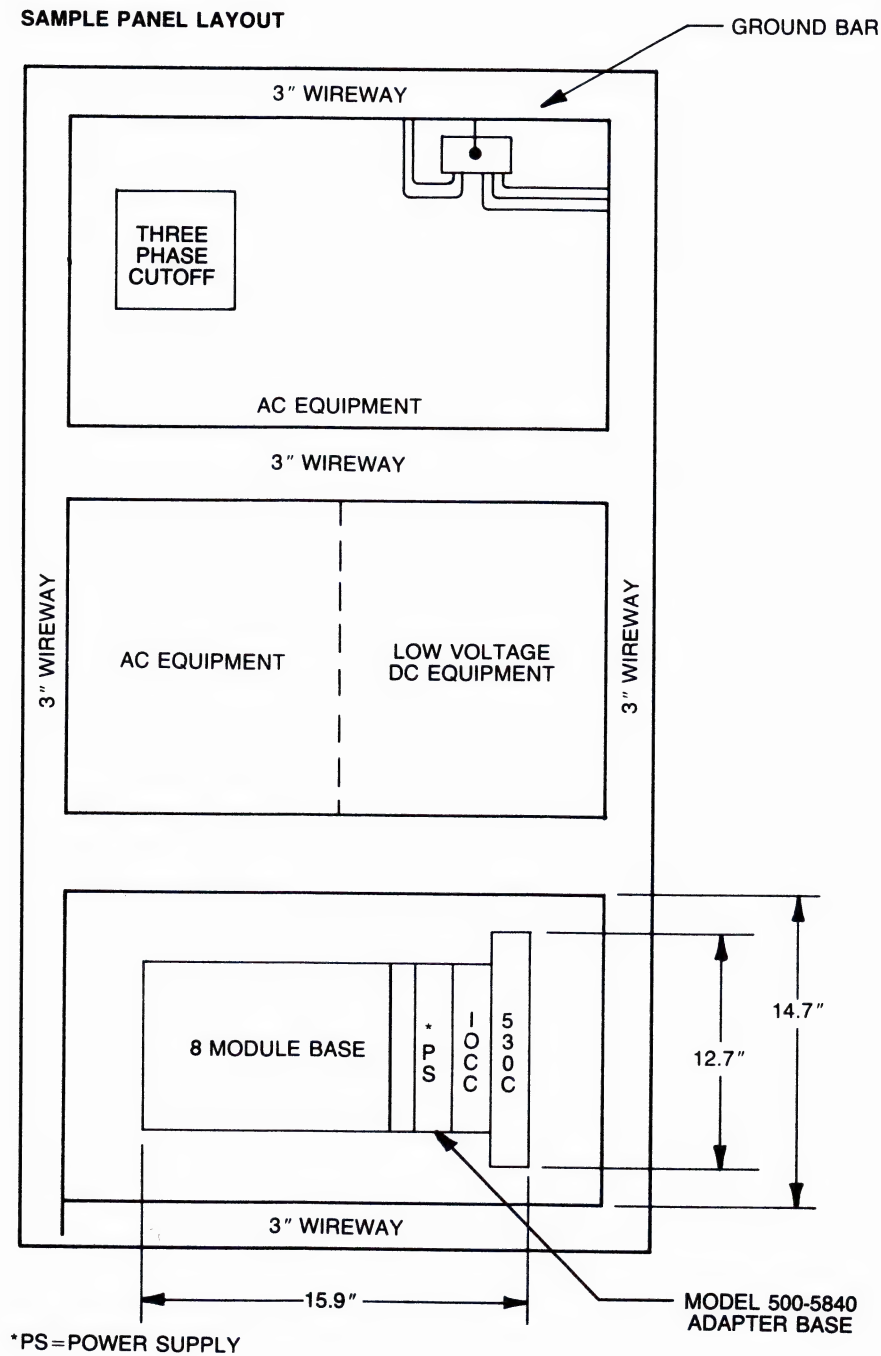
Wireway Layout for Model 500-5864 Base Assembly with Adapter Base
